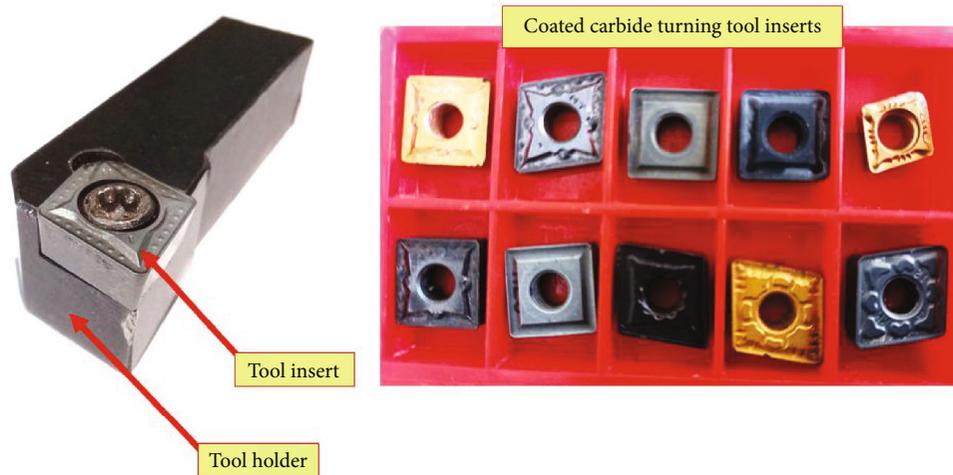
Tool insert, tool holder, and types of coated carbide tool inserts.
